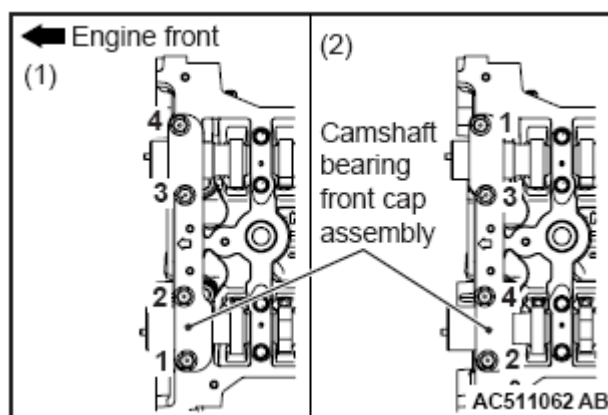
Tightening Camshaft Bearing Front Cap Mounting Bolts
